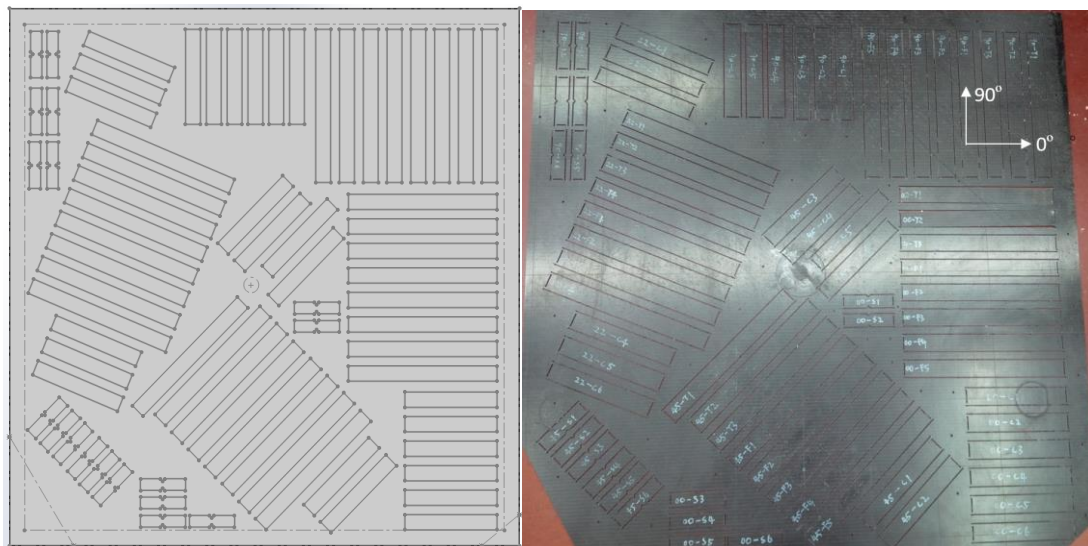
Specimen layout showing orientations in CAD and after machining the sample plate
